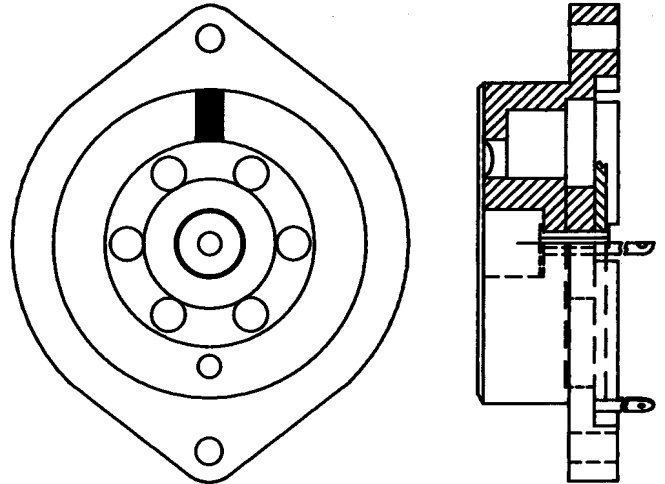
KS-8132, L1, Vacuum Tube Socket
